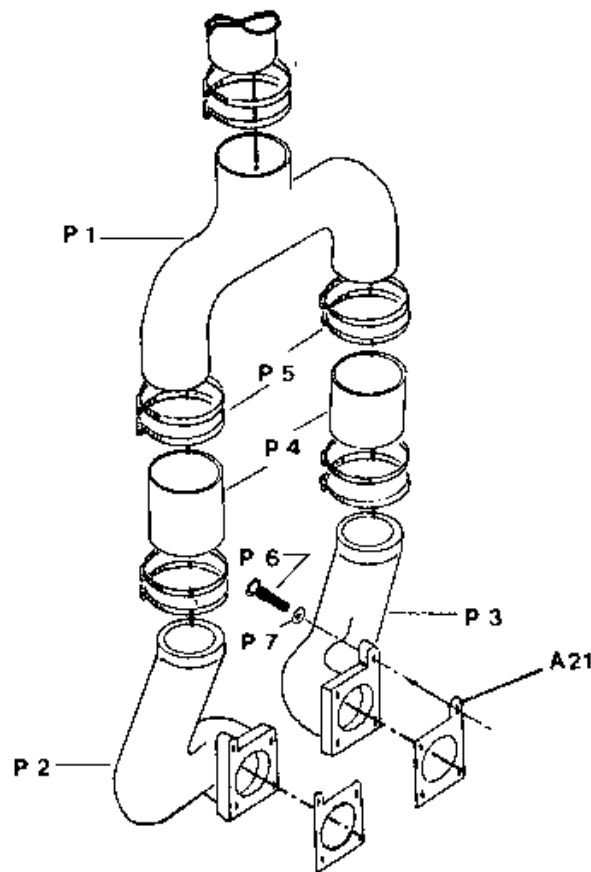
EXHAUST KIT 7.3 TURBO ENGINE
